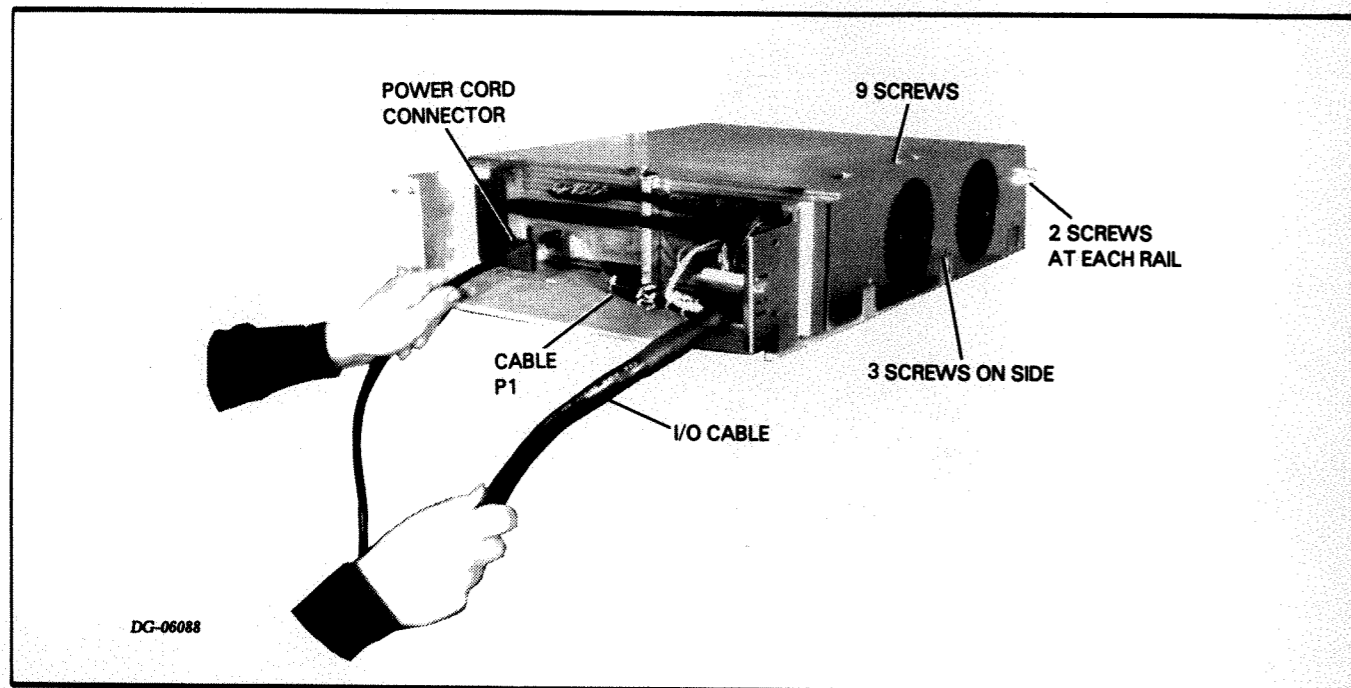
REMOVING CABLES FROM BACK OF 5-SLOT CABINET
